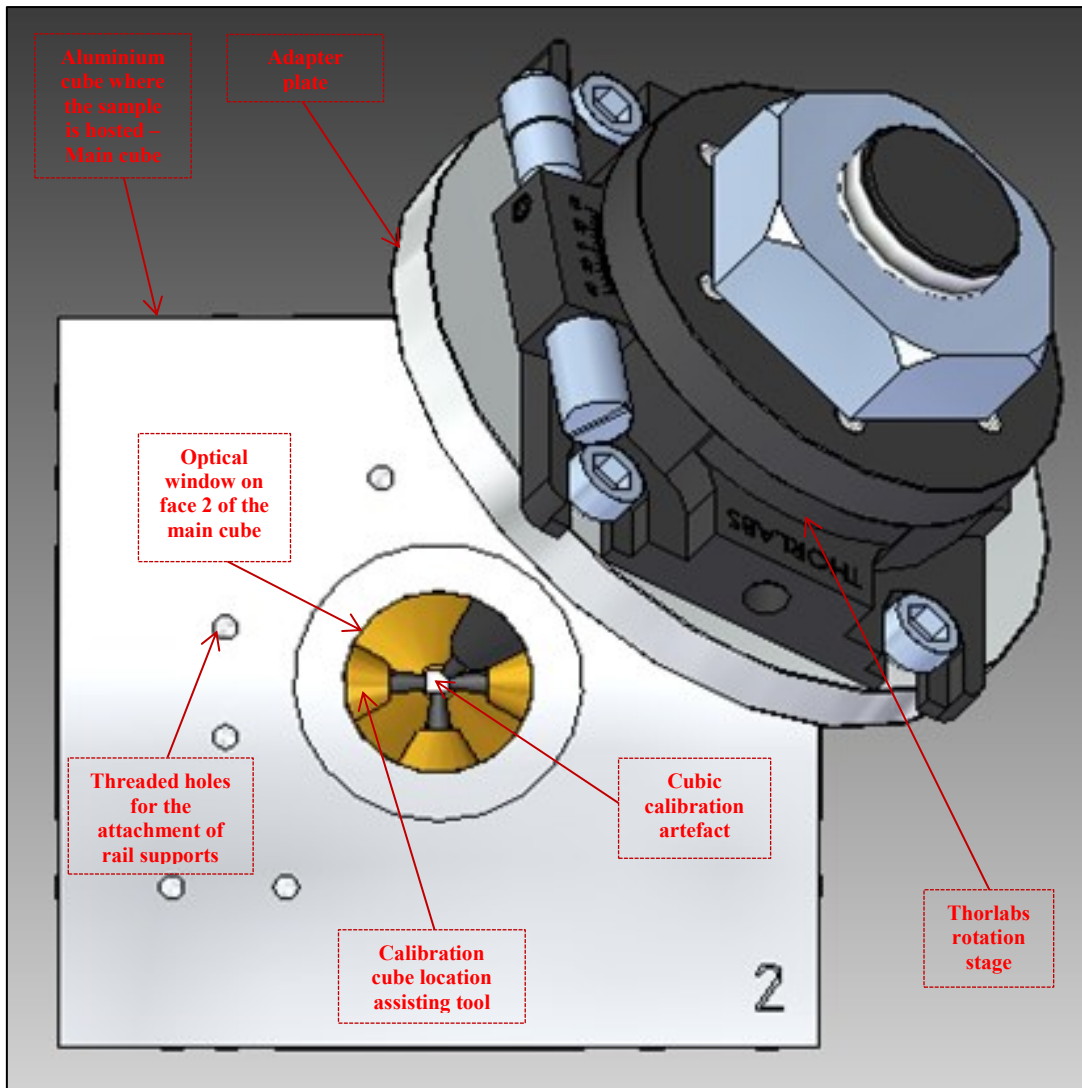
Side view of the CAD model showing the calibration artefact assembly from the second view point optical window.
